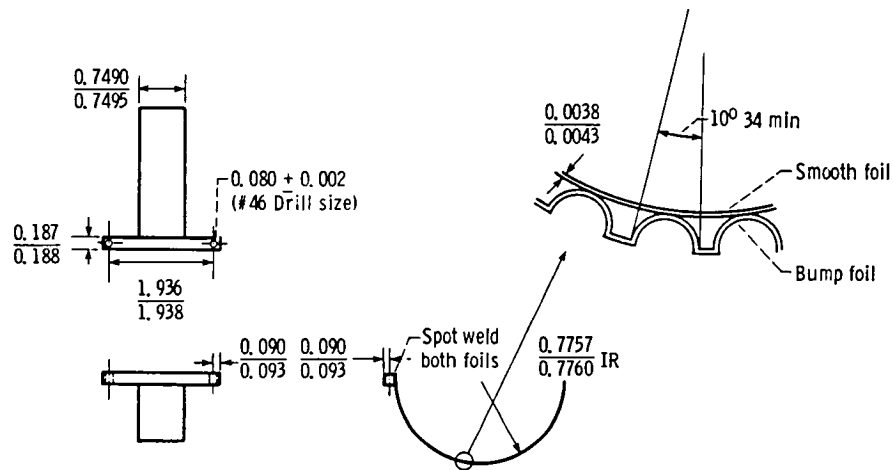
Compliant foil gas bearing assembly. Material, Inconel x-750. Dimensions are in inches.
